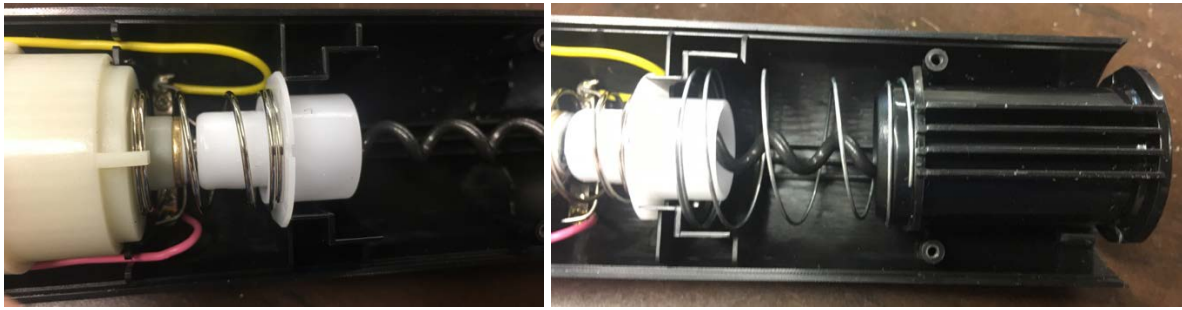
Replacing the cutoff switch cap, two springs, and black end cylinder.
